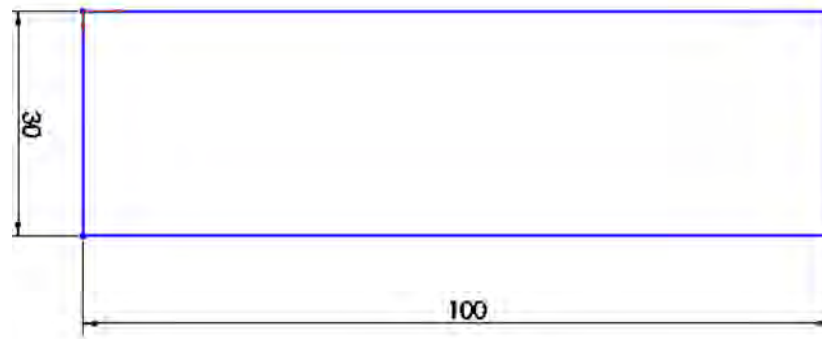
Dimension compression test un-notched specimens. All dimensions in millimeters.
